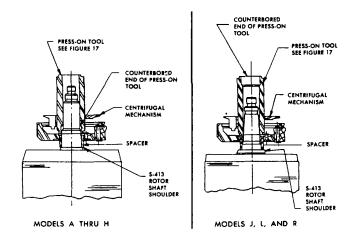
CENTRIFUGAL MECHANISM ASSEMBLY
